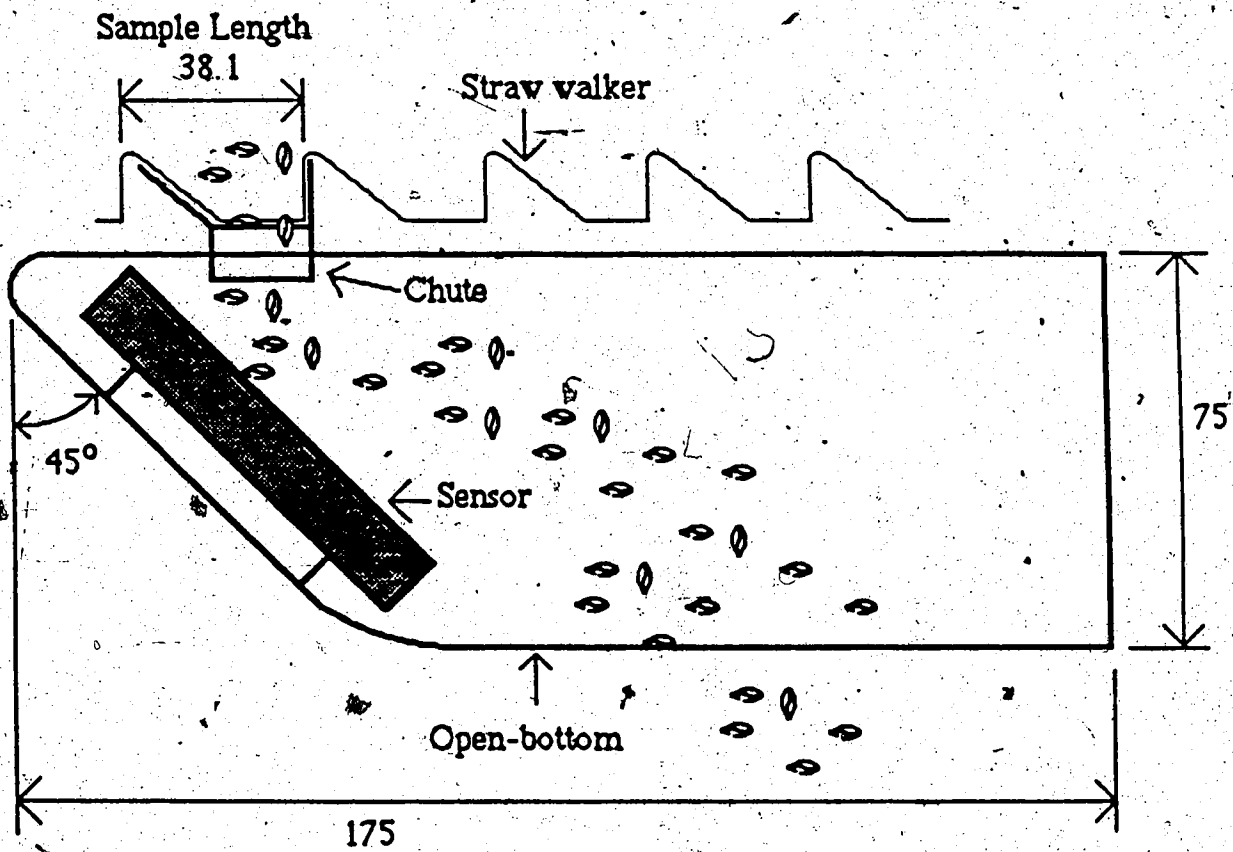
Field Test Sensor Housing. (all dimensions in mm)
